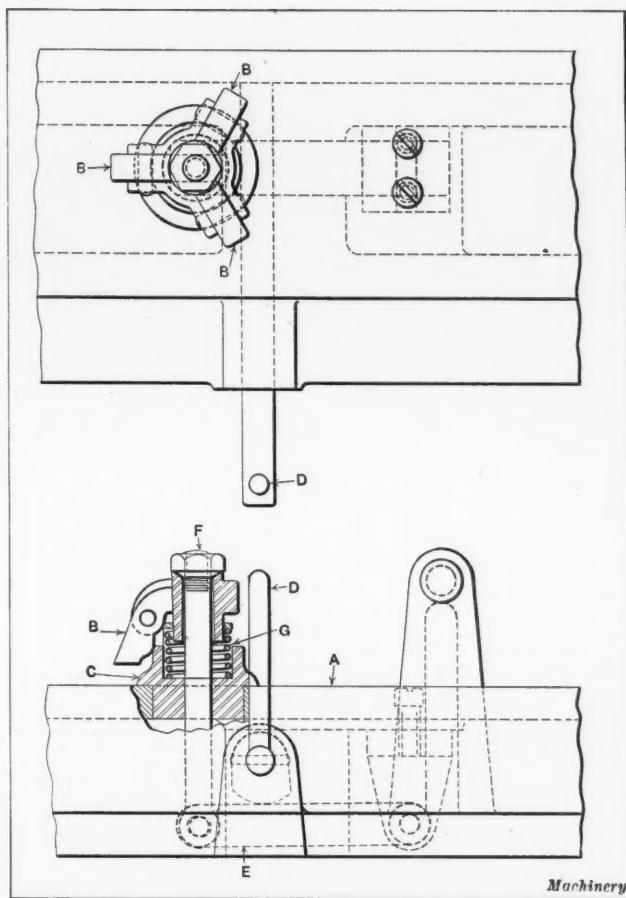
Expanding Type of Clamp used on Engine Base Fixture shown in Fig. 10
